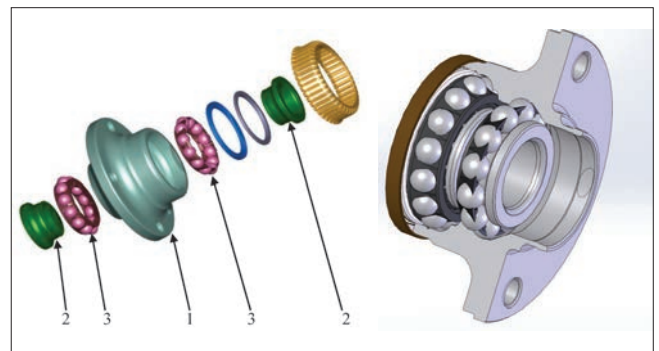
An example of a constructional solution for a road wheel bearing with a second-generation hub bearing with the use of a ball bearing structure: 1 – outer ring with a collar, 2 – inner rings, 3 – basket with balls
